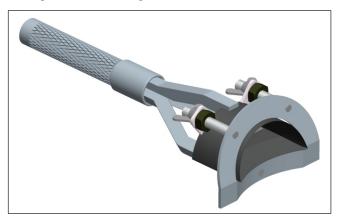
Gum tapping blazer designed in Pro Engineer (Cero Element) CAD software
